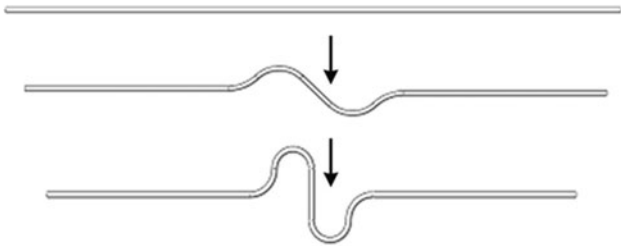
Z-shaped wire specimen has two-stage wire forming sequence
